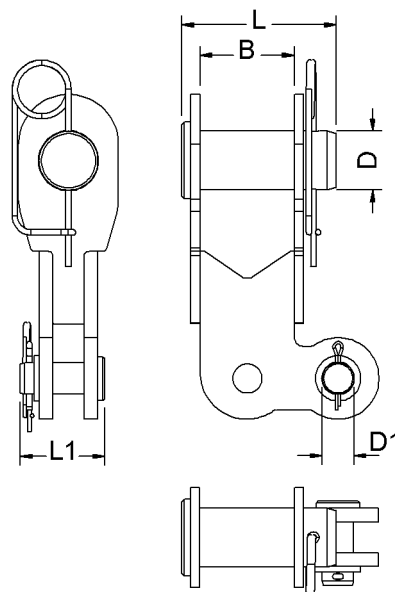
Dimensions of backstay strap connector on 1507 fixed jib
